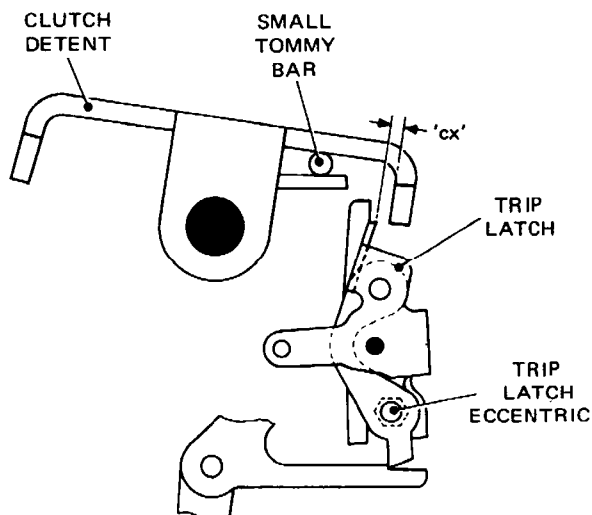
TRANSMITTER CLUTCH DETENT/TRIP LATCH CLEARANCE
